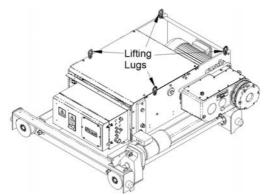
Double Girder Crab Lifting Points – 4 & 8 fall units
